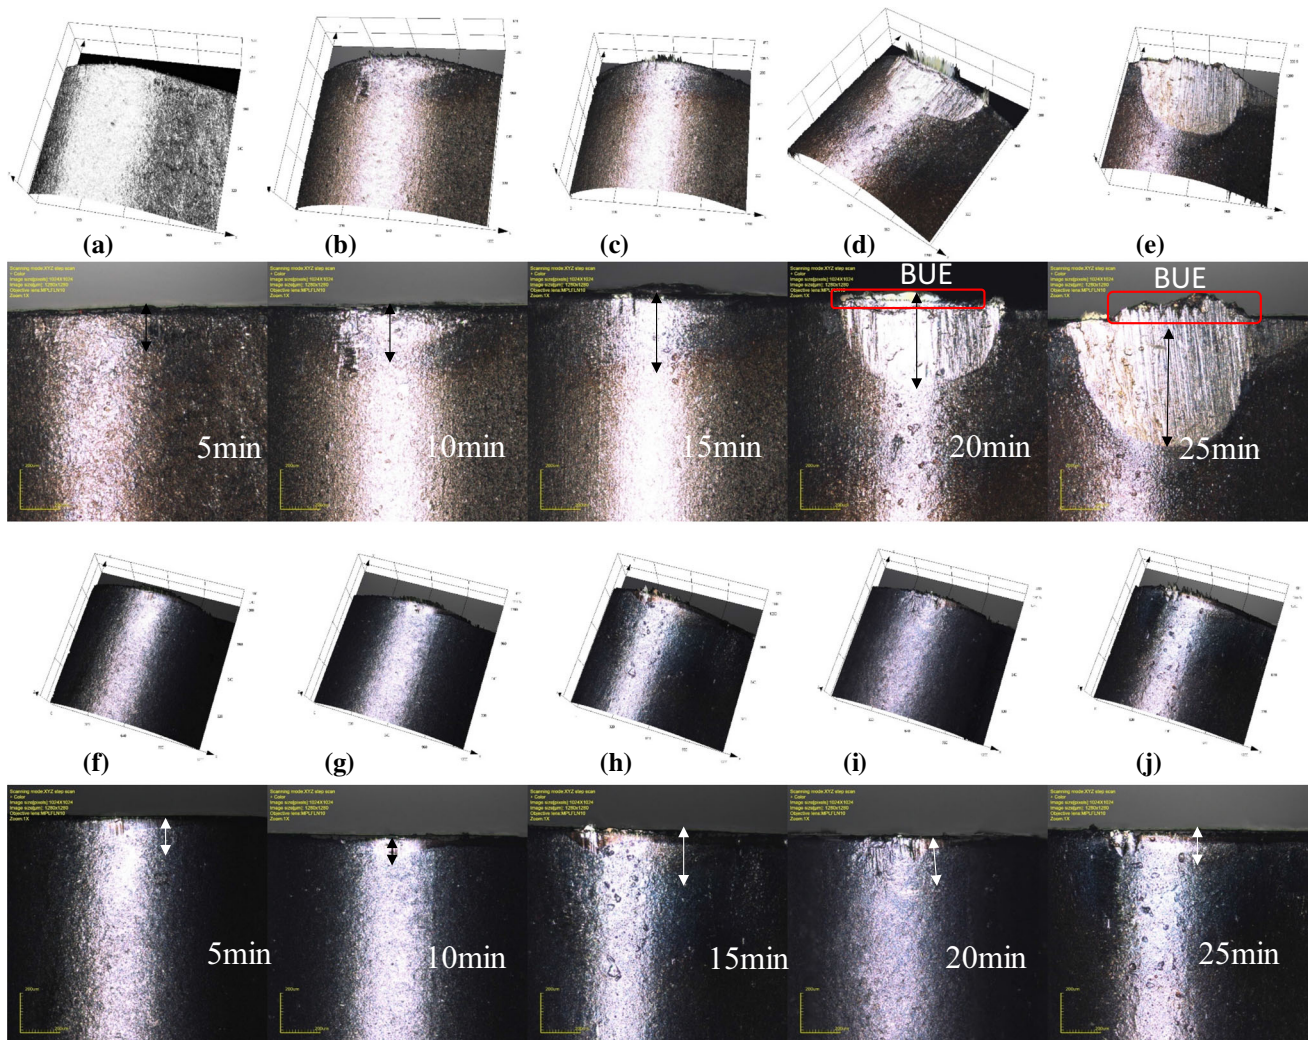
Tool wear measurements for a–e uncoated tool and f–j coated tool
